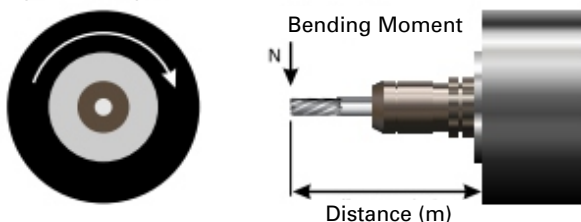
Front and side view of torque and tool-bending moment on a spindle.
